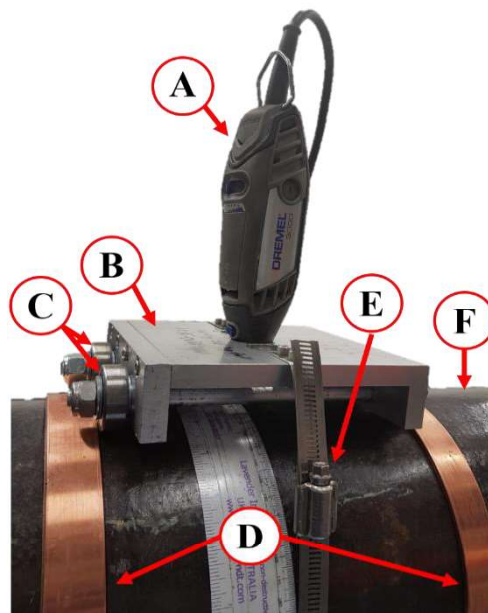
The notch milling setup which consisted of: A. Dremel rotary tool; B. aluminium platform; C. angular contact ball bearings; D. guiding rails; E. stainless steel hex screw worm drive band; F. pipe.
